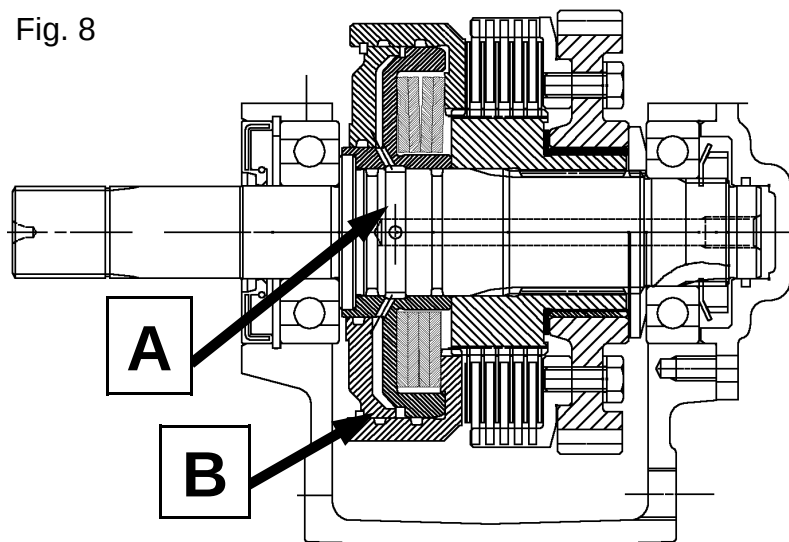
illustrates the internal circuit of the clutch that engages the four-wheel drive. Oil flows at a pressure of 40 bar from the solenoid valve unit described on the previous pages, through hole A of fig. 8 into chamber B. Here, the pressure overcomes the reaction of the Belleville washers and disengages the four-wheel drive.
